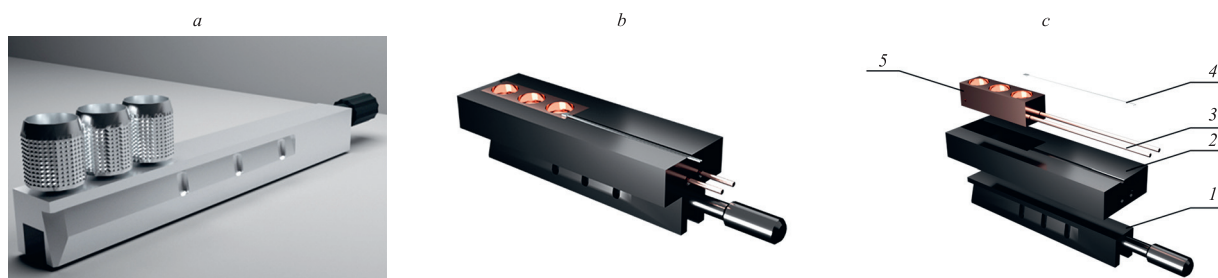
Three-dimensional model of a retractable holder: standard retractable sample holder (a); modernized specialized retractable sample holder, assembled (b); modernized specialized retractable sample holder, disassembled (c).
